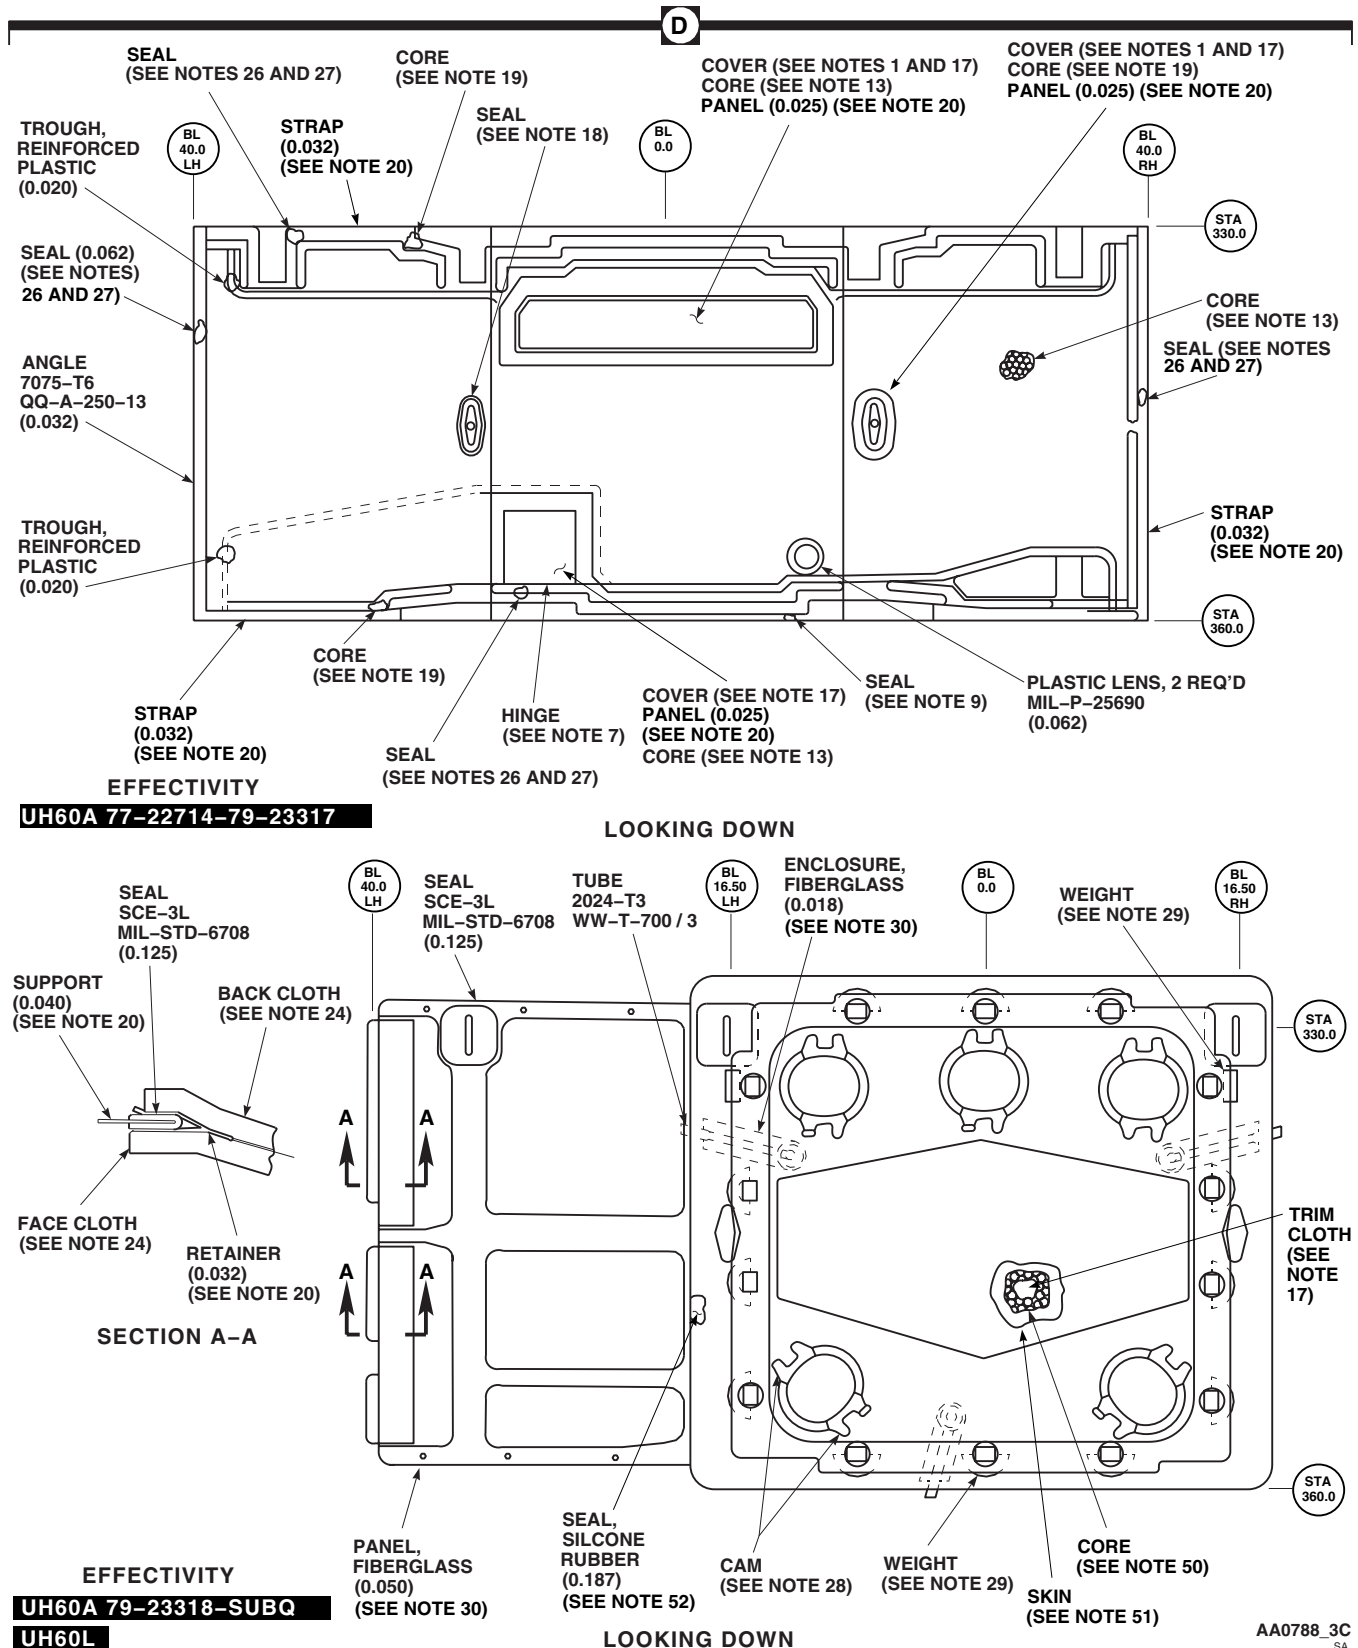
Soundproofing Panels (AVIM). (Sheet 3 of 13)
